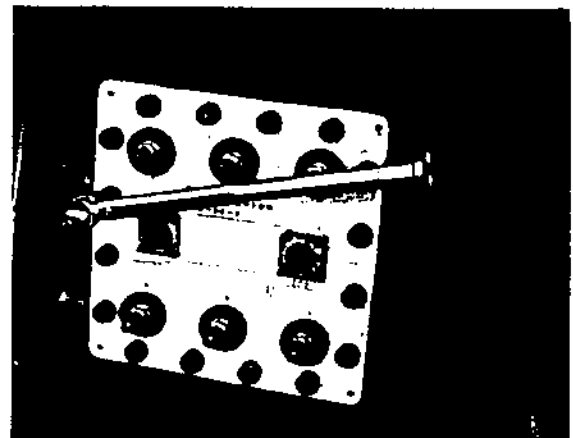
TORQUING TERMINAL PLATE SCREWS
